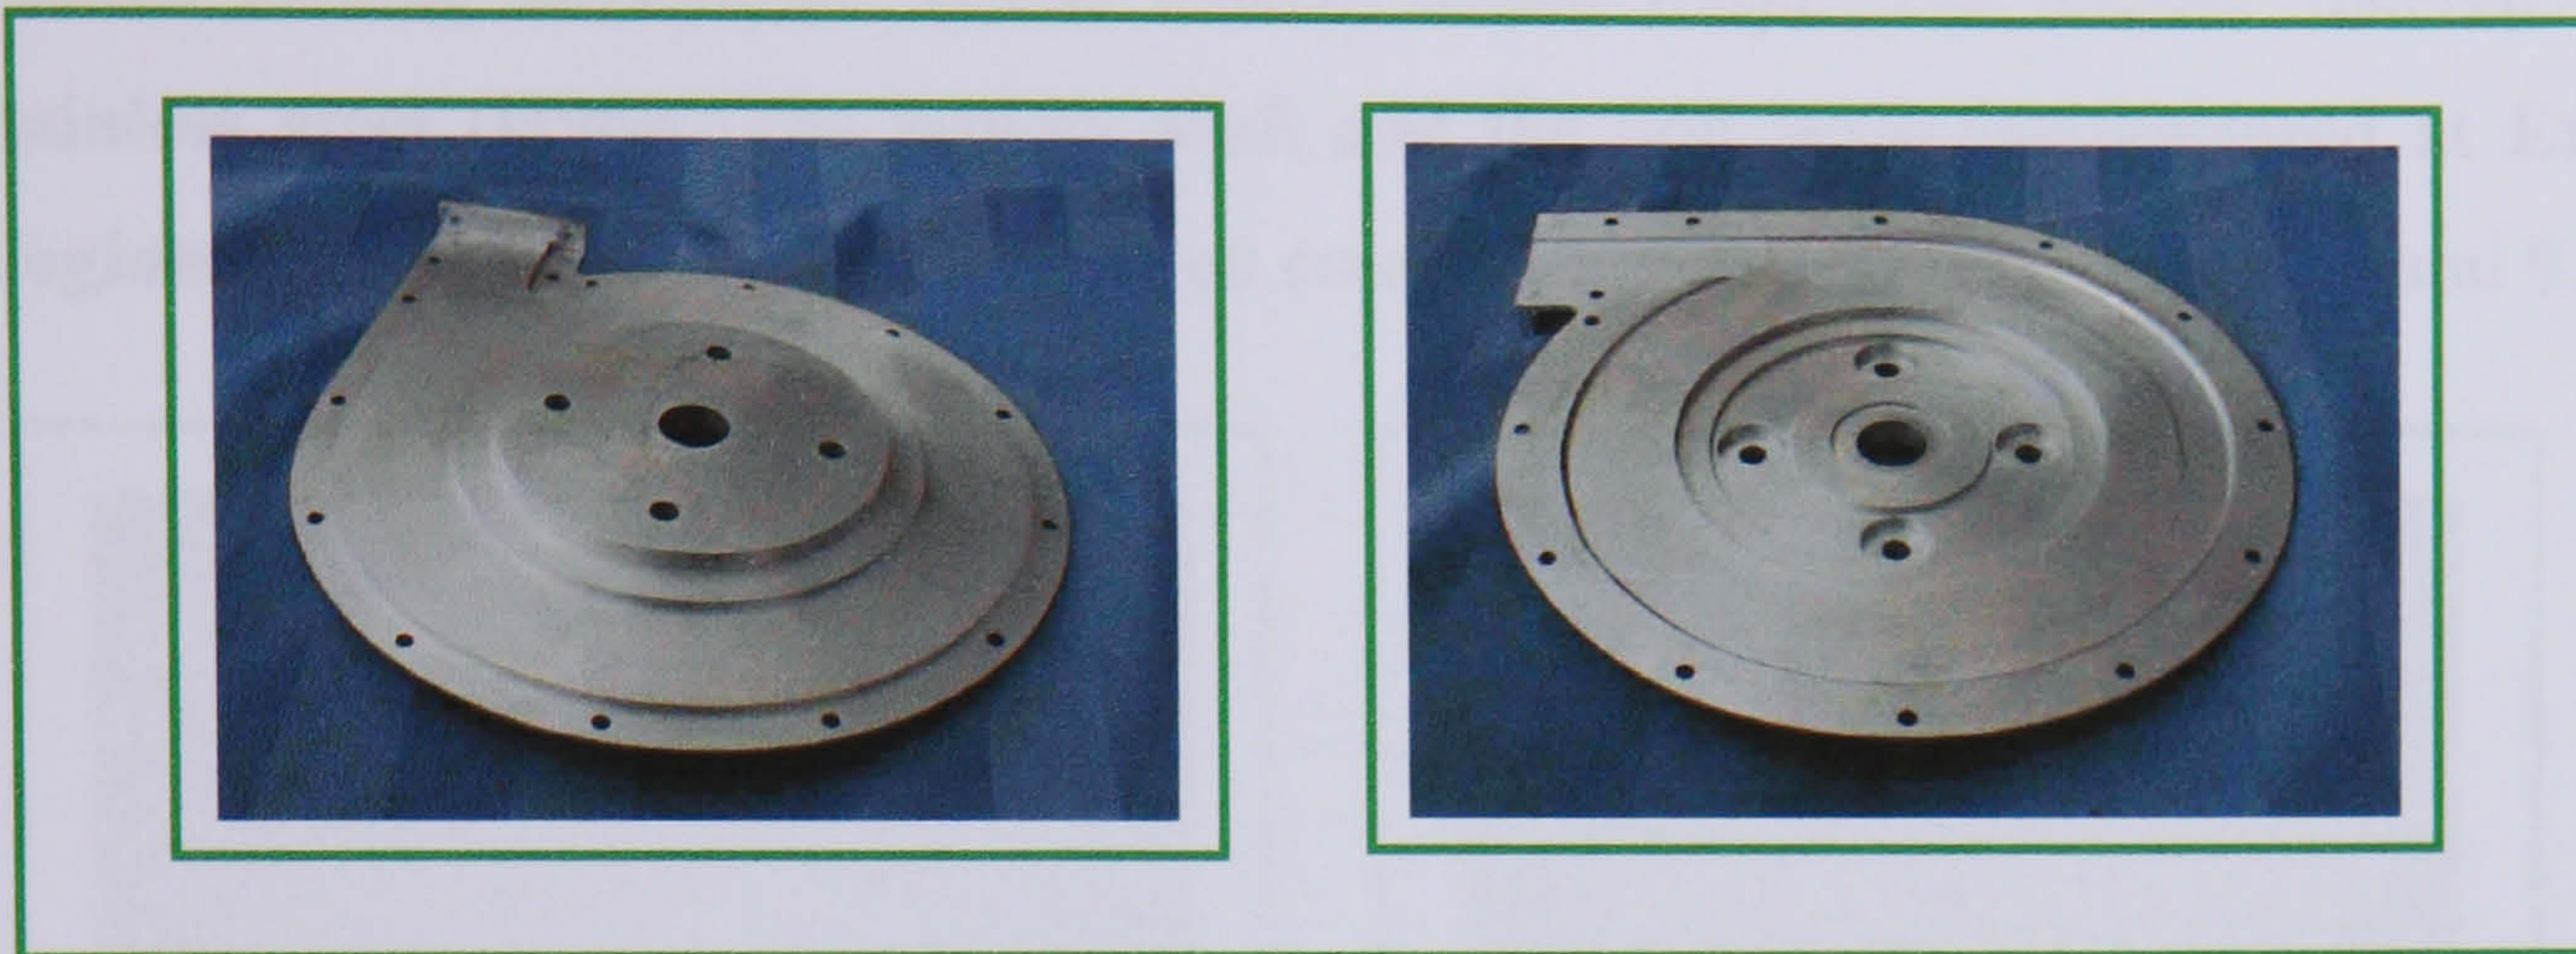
COMPRESSOR CASING COVER MACHINED FROM ALUMINUM ALLOY-7075
